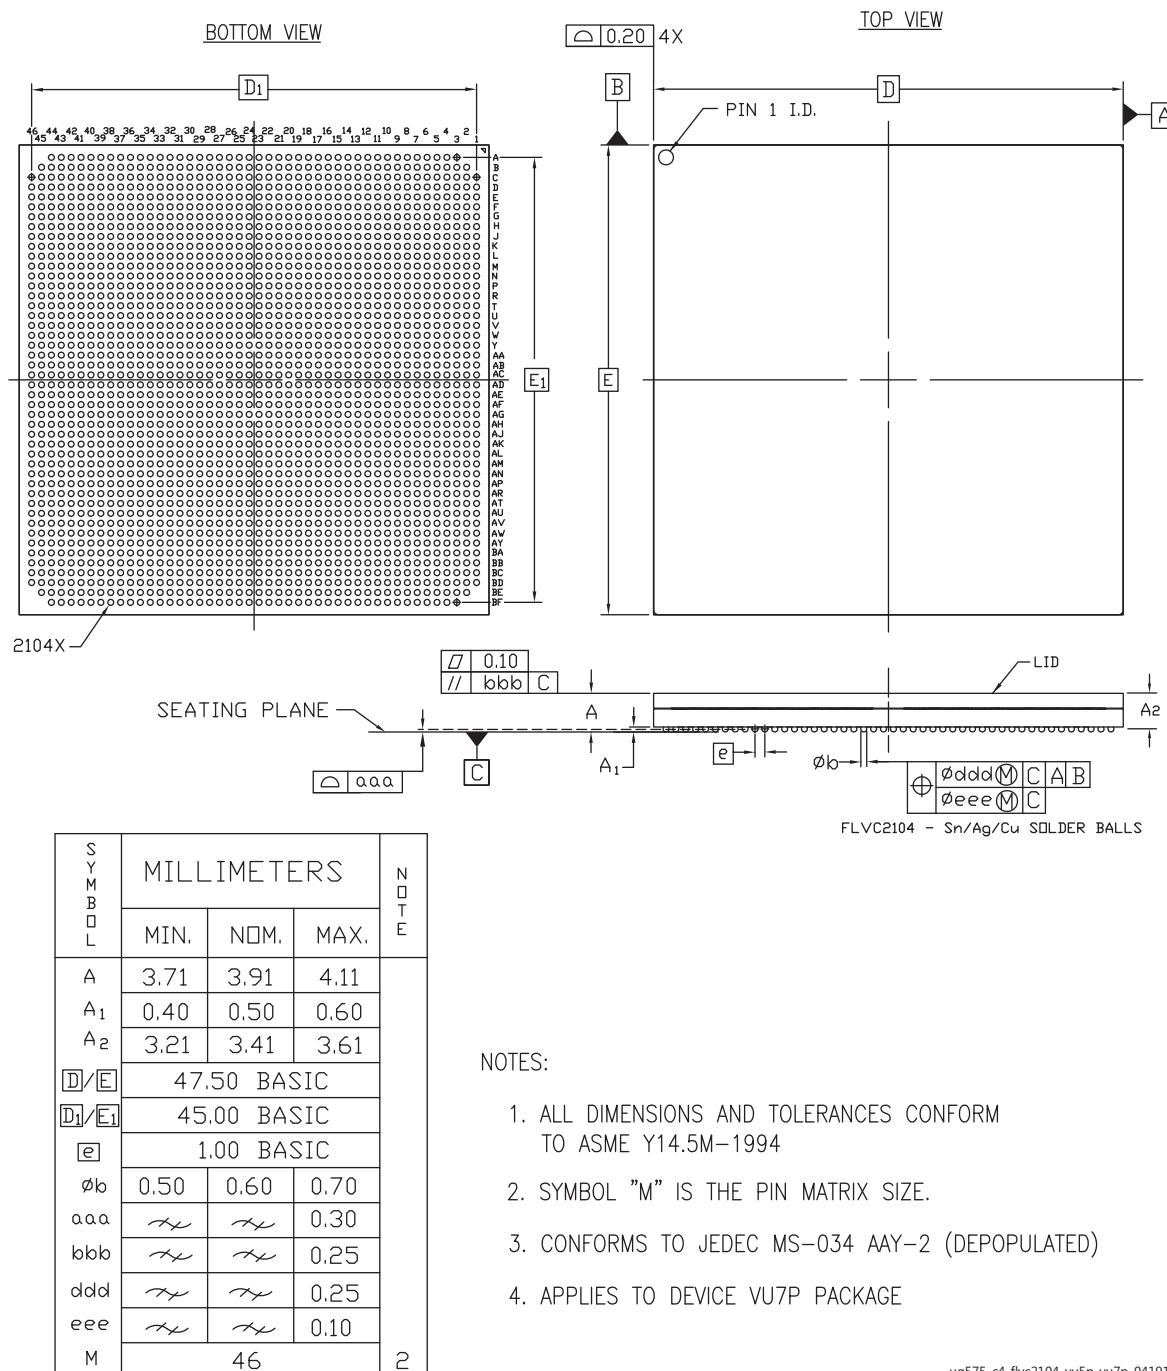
Package Dimensions for FLVC2104 (XCVU5P and XCVU7P)
